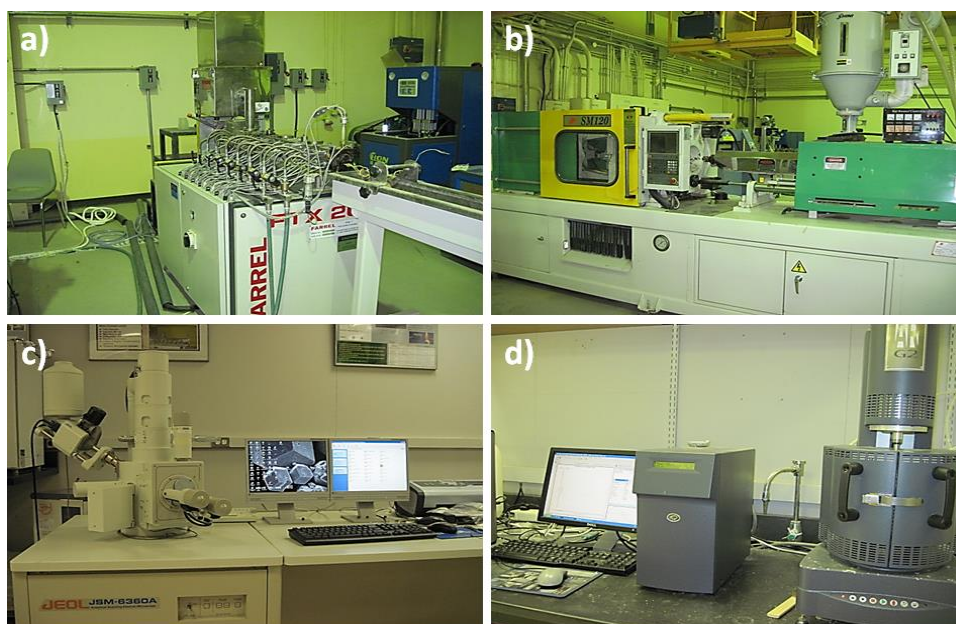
Photograph of a) Twin-screw extruder (TSE); b) Injection molding machine; c) Scanning Electron Microscopy (SEM); d) Oscillatory rheometer
